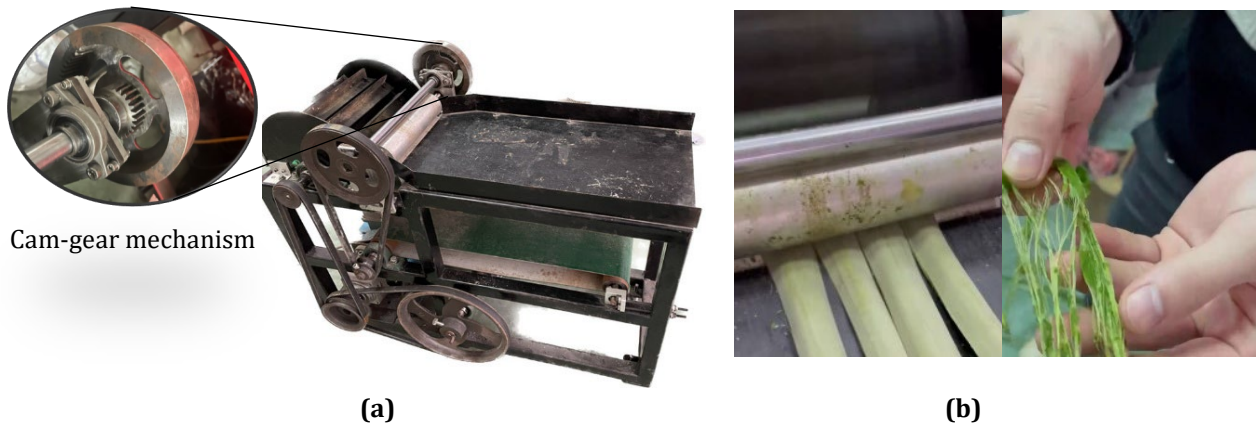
Pineapple fibre extraction machine (a) Fabrication of machine; (b) Extracted pineapple fibre
